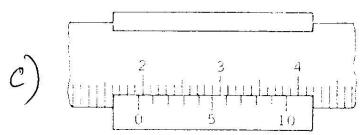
! VERNIER CALIPER. MEASUREMENTS.
